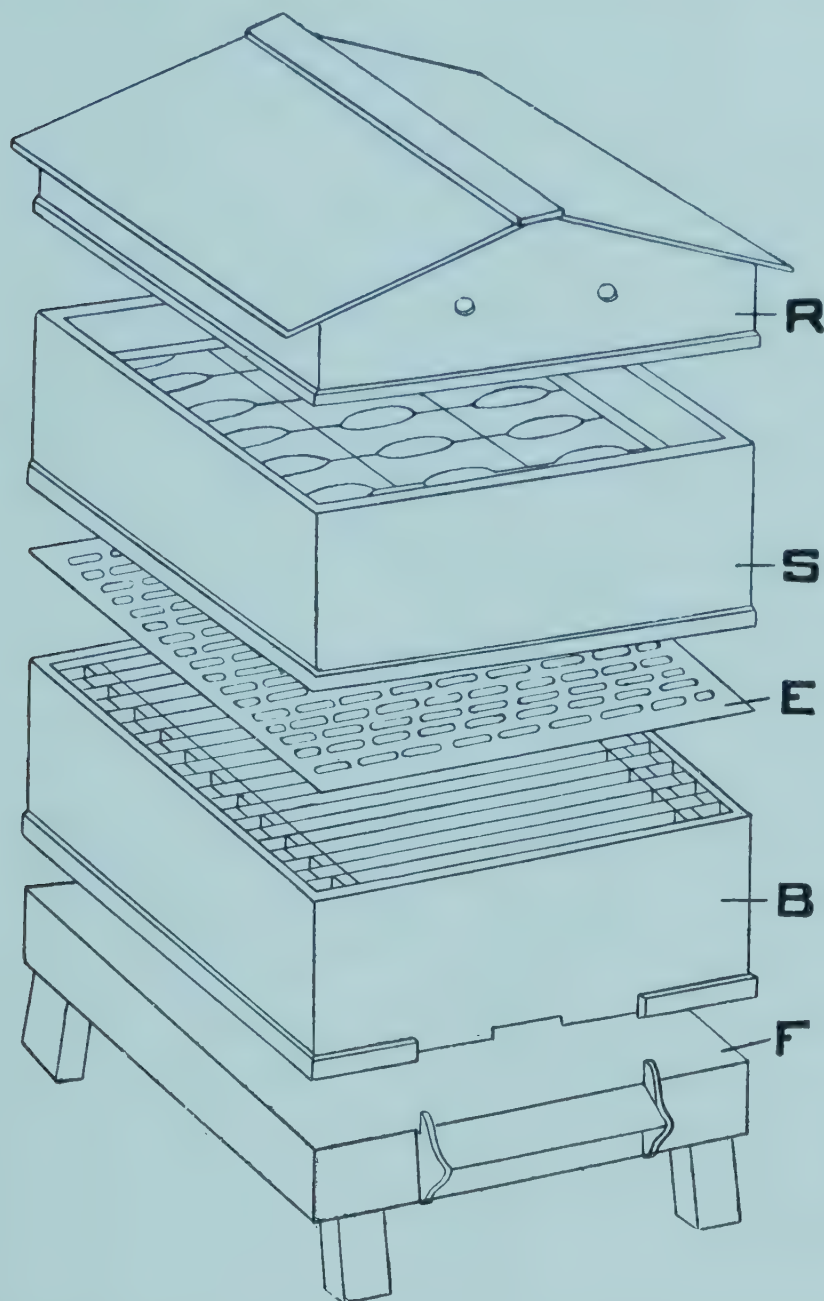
Hive with super arranged for comb honey ; parts shown separately.
